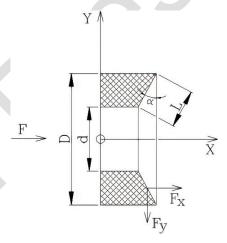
Calculation scheme for the trapezoidal cross-sectioned hermetic element
